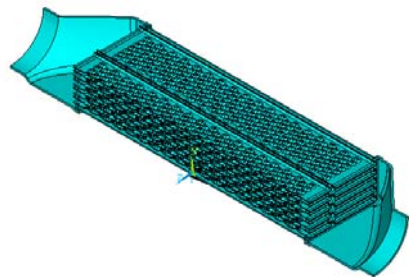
3-dimensional modeling for dimpled tube type intercooler using CATIA V5 R16
